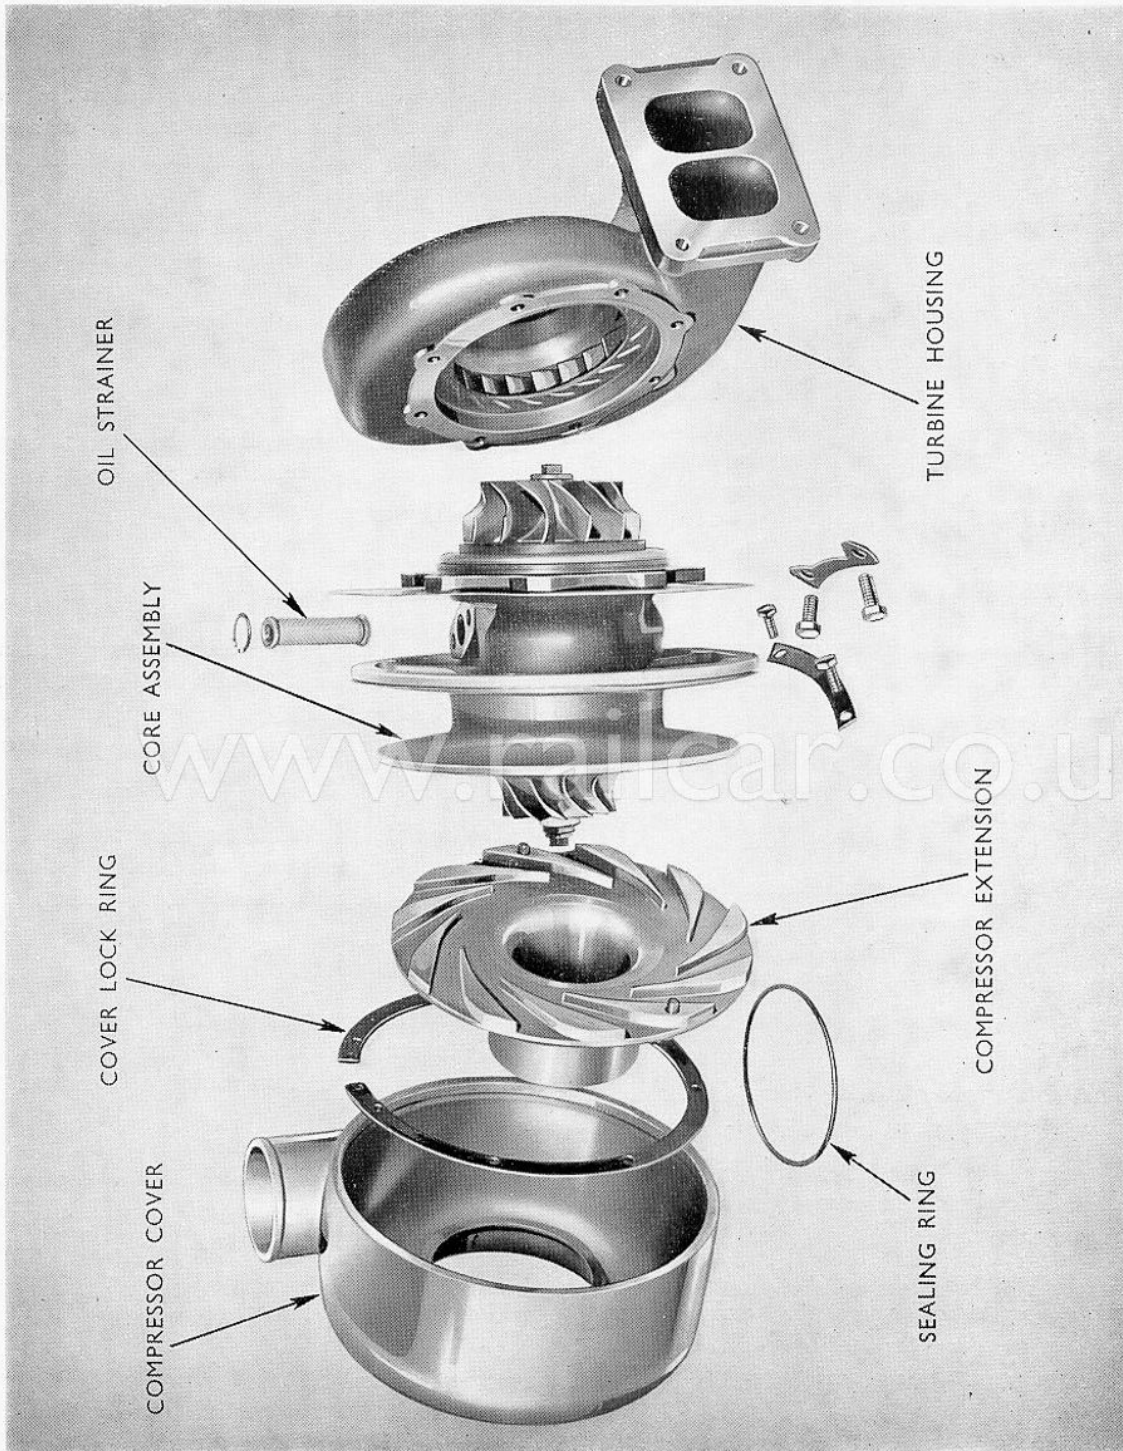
EXPLODED VIEW OF HOLSET TURBOCHARGER
